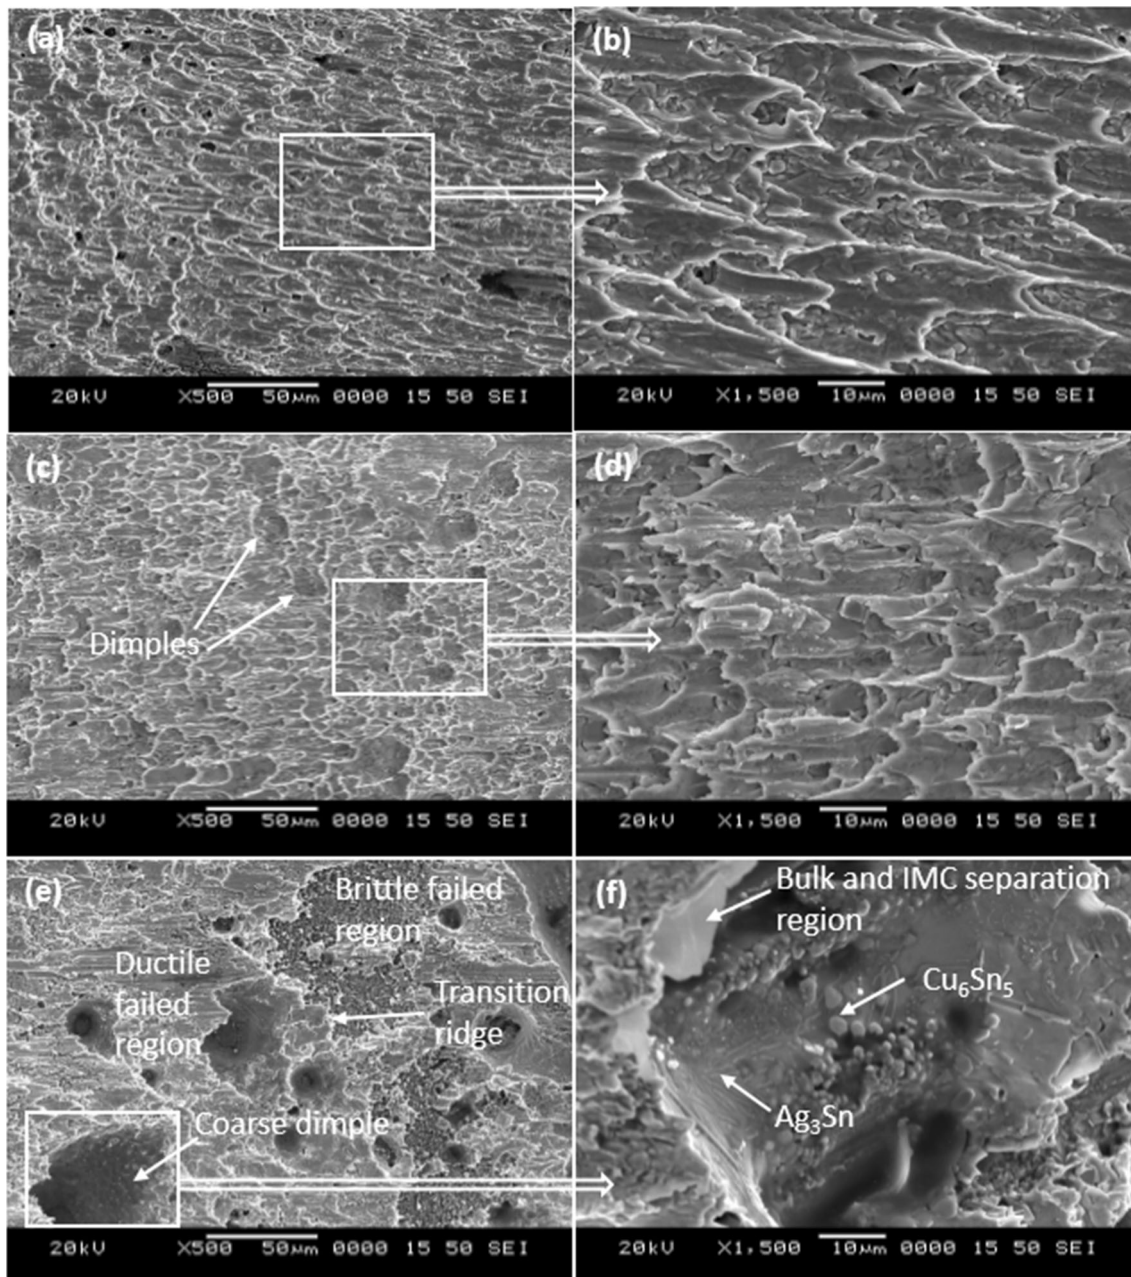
SEM images of fractured samples after shear test for SAC305 solder alloy with Al_2O_3 nanoparticles addition: (a) fracture surface for unreinforced SAC305 (b) magnified ductile fractured area, (c) ductile fractured surface showing small dimples for SAC305-0.1 Al_2O_3 , (d) enlarged ductile surface with dimples, (e) mixed mode fractured surface showing ductile and brittle fractured region along with transition ridge for SAC305-0.5 Al_2O_3 , (f) magnified coarse dimple area showing broken Cu_6Sn_5 and Ag_3Sn IMCs
